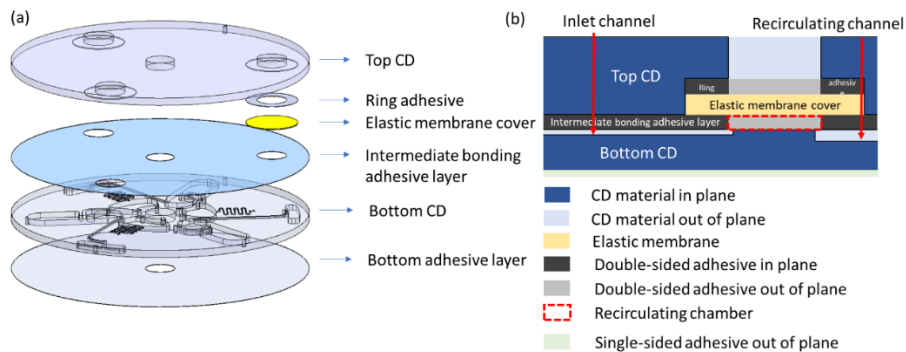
Layout for CD assembly. (a) Detailed layout of the CD components. (b) A schematic cross-sectional view of the recirculation chamber. The red dashed square indicates the recirculation chamber, which has a thickness of 100 μm .
